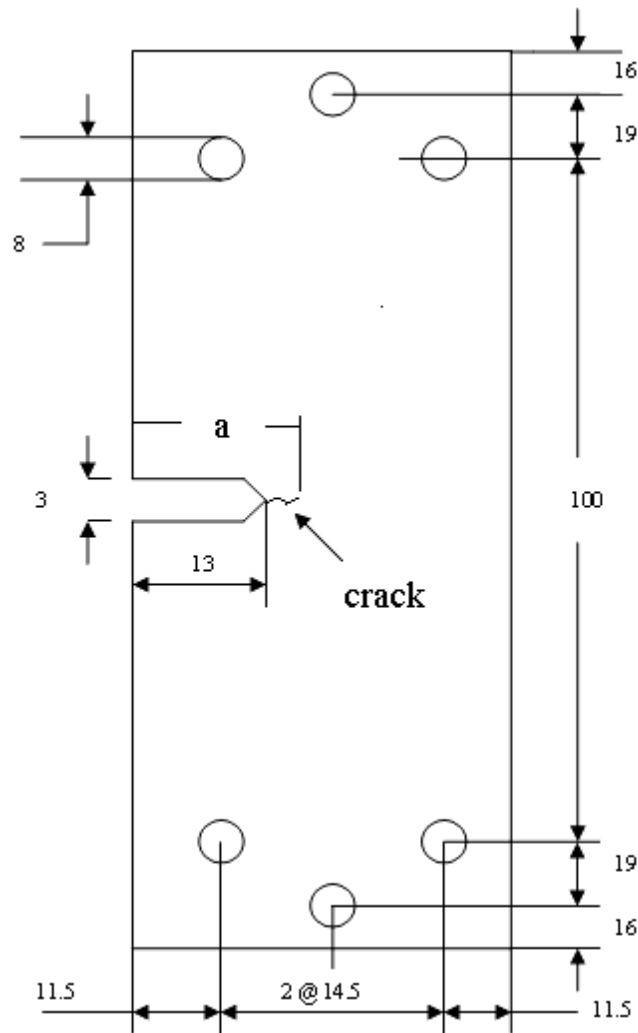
Single Edge Notch (SEN) Specimen geometry (LT orientation)
